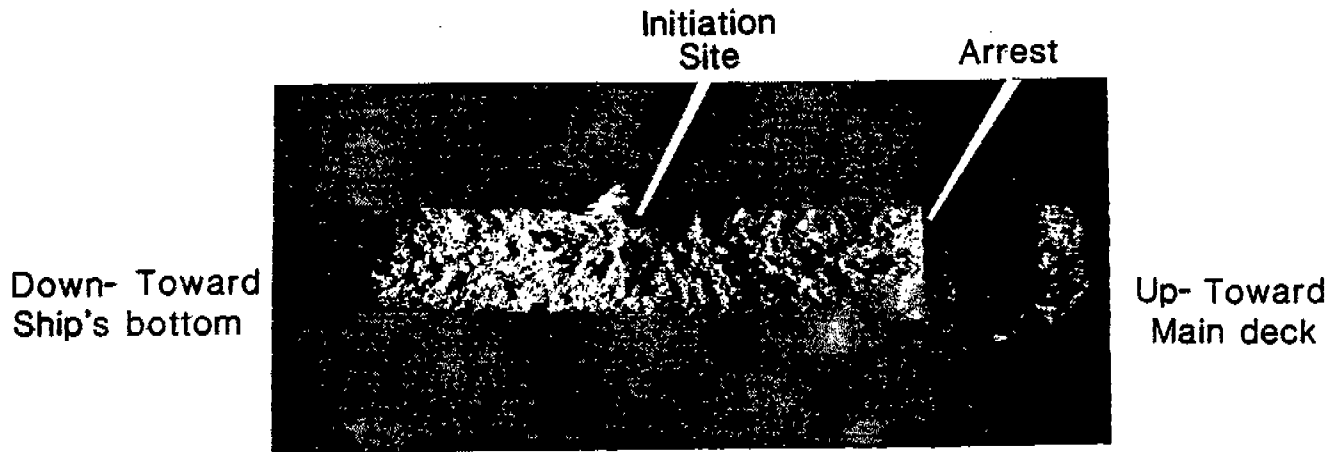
Piece no. 3 (top of longitudinal bulkhead) initiation site showing crack entering Piece no. 3 through weld of angle to Piece no. 3. Crack goes to rivet hole on right and down the bulkhead to left.
